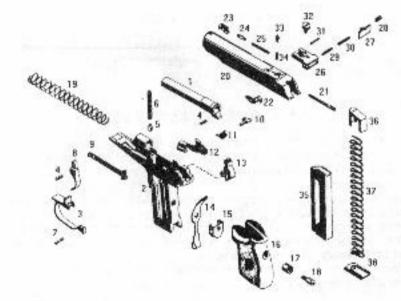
Parts of LI-70 eight-shot pistol in 9 mm Makarov or Kurz caliber.
